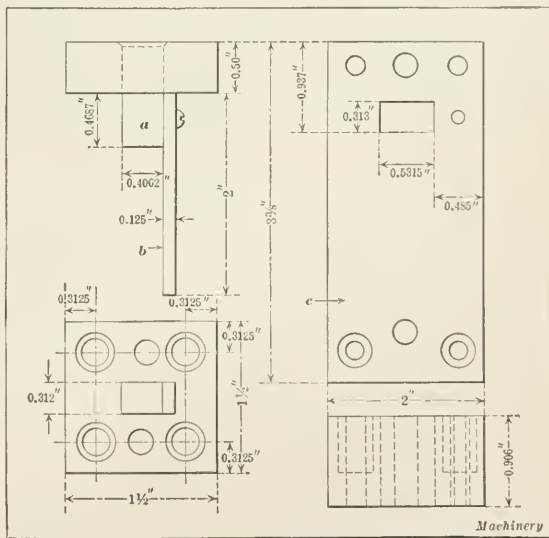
Details of Die, Punch and Stop for gaging Advance of Strip
